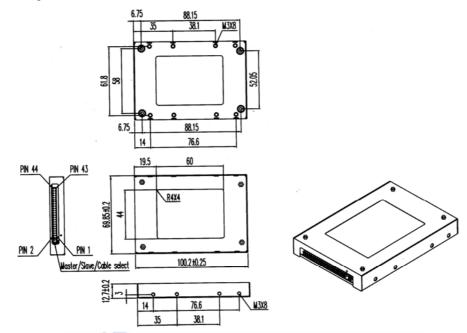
Mechanical Dimensions of 2.5" Tiger IDE SSD (H = 12.5mm)
